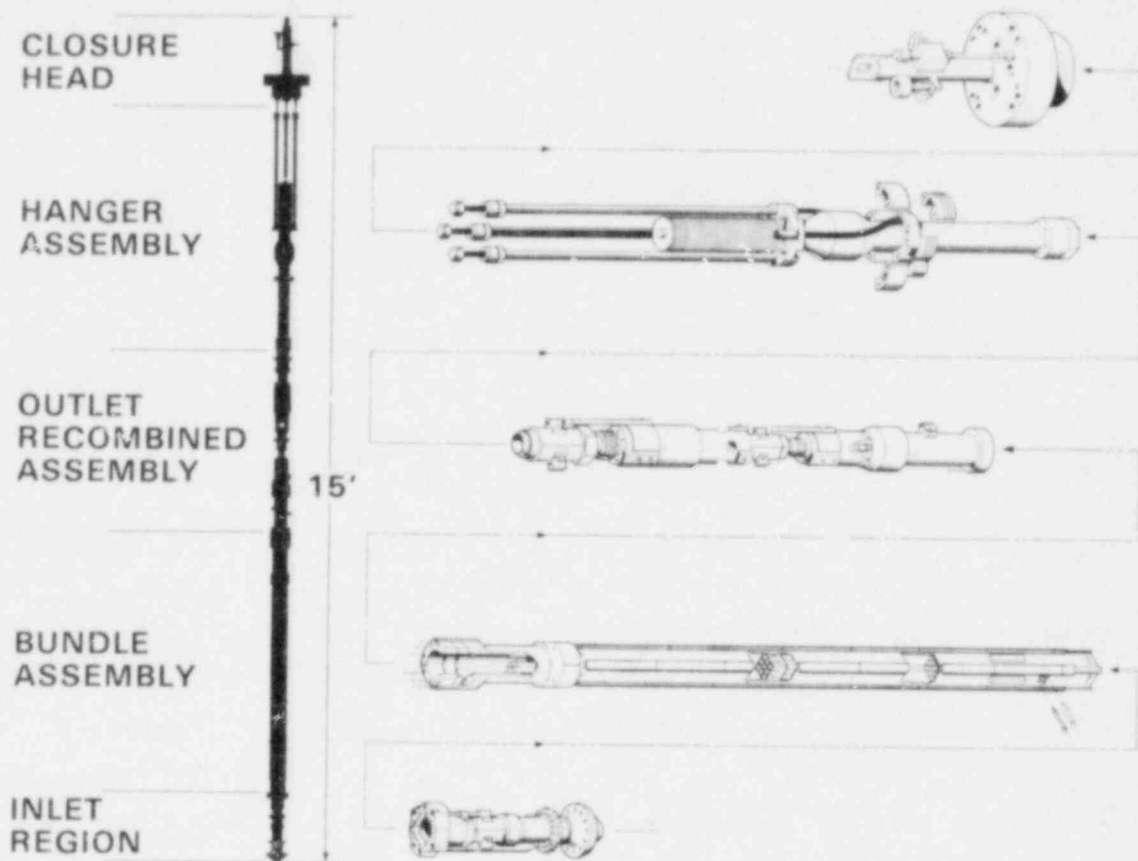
Modular Design of the Nine-Rod Fuel Bundle Assembly
